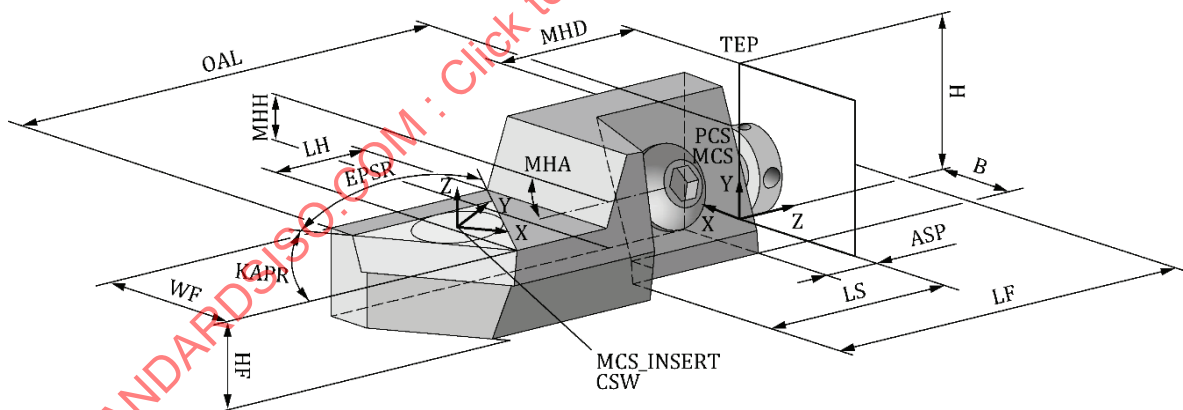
Assembled end cutting ISO-cartridge with positive cutting item
